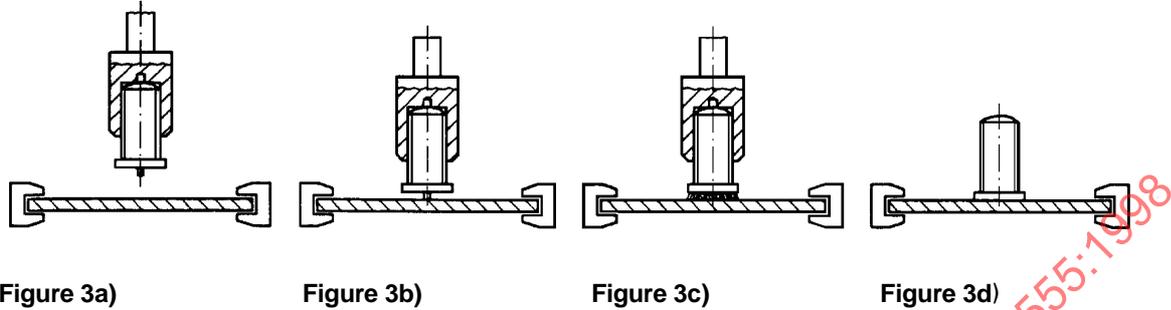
Capacitor discharge stud welding with tip ignition - Main phases of the welding process
